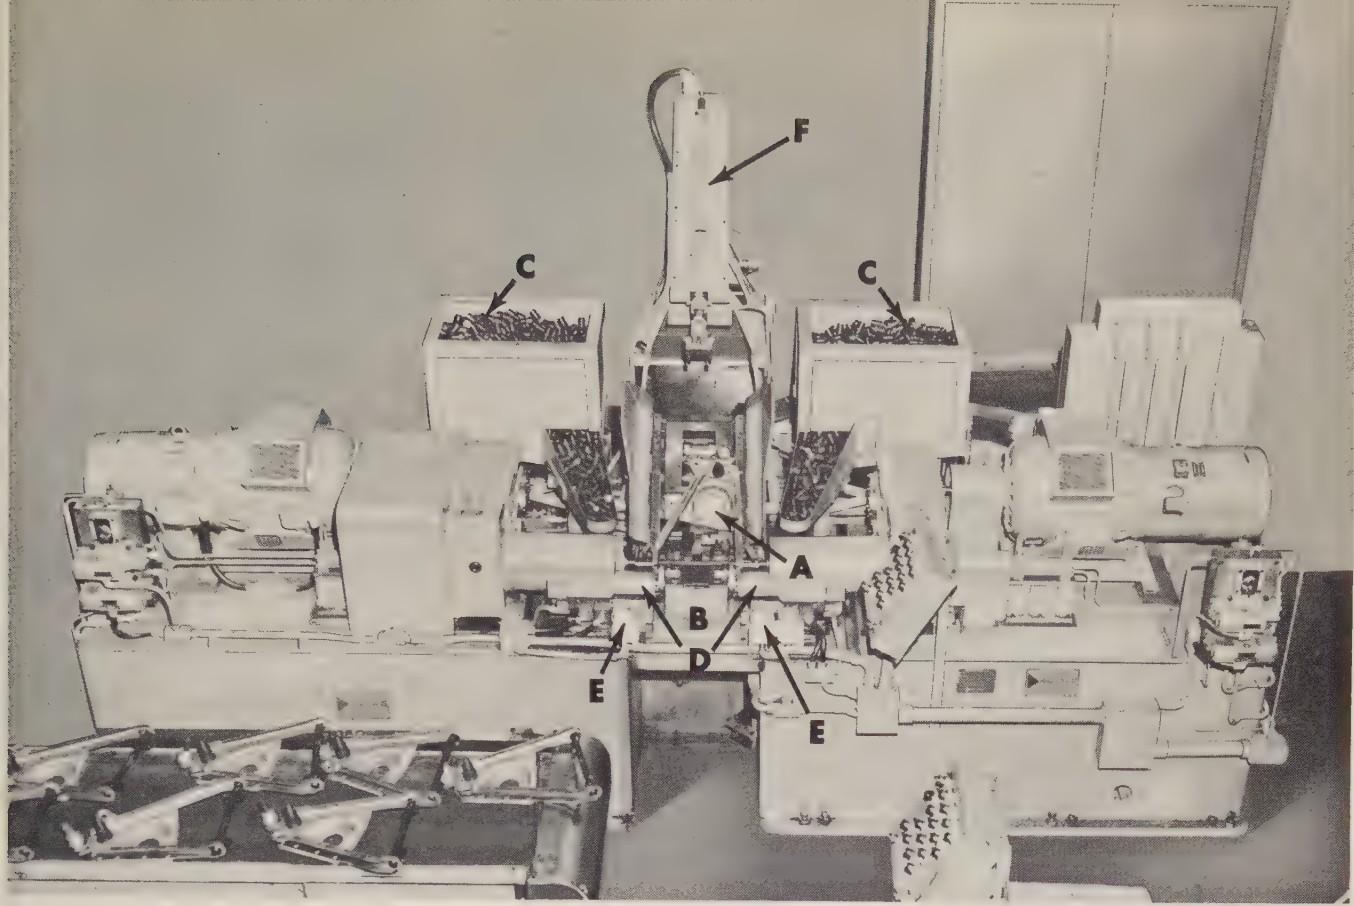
This semi-automatic assembly machine was developed by methods engineers of Oldsmobile Division to assemble cross shafts and bushings into the lower control arm of the ball-joint front suspension. The control arm (A) is loaded first into the clamping fixture (B), and the bushings are loaded from hoppers (C) into the driving sockets (D). The operator then presses the cycle start buttons (E). This puts the machine in automatic cycle to drive the bushings. The assembly is disposed of automatically when the unload cylinder (F) retracts.
